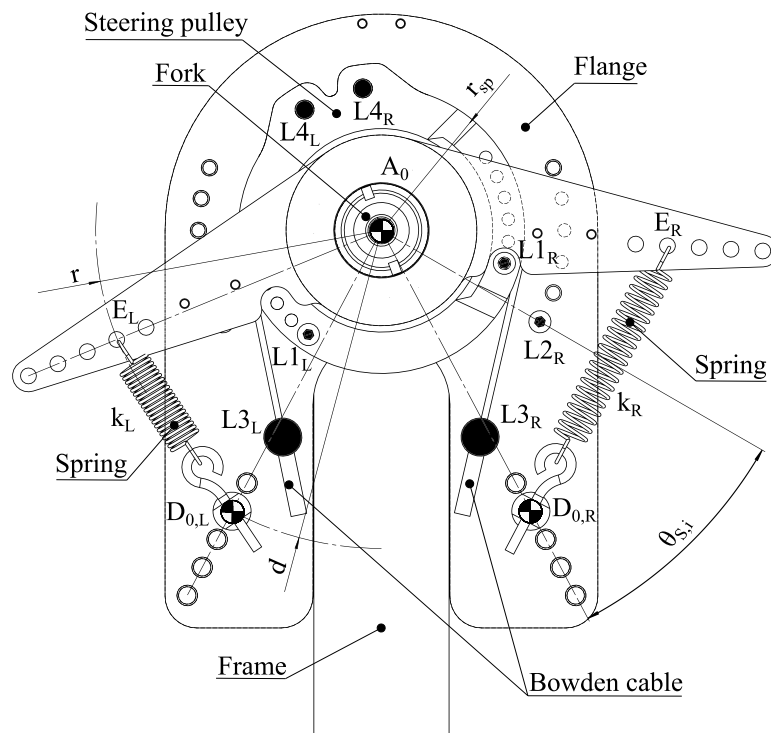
Top view of the new steering compensator mechanism, executive design
